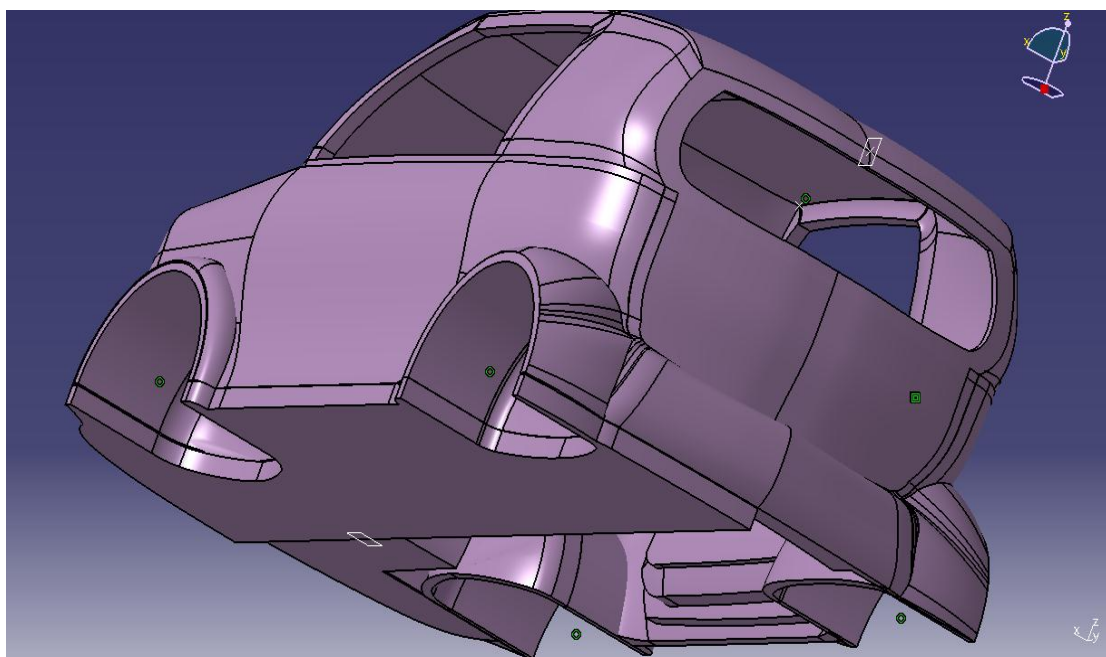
Creation of floorboard's wireframe model as a projected section.
